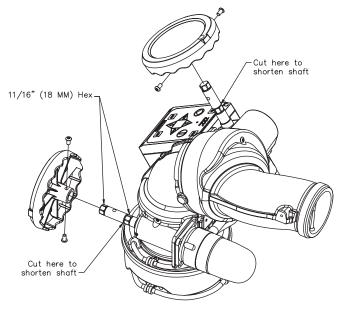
Wrenching Hexes on Drive Shafts
